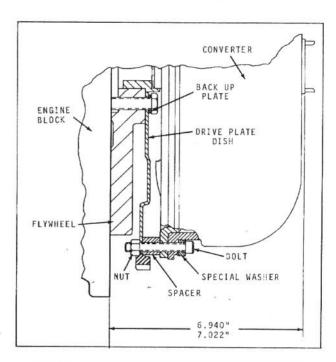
CUTAWAY ILLUSTRATION OF TORQUE CONVERTER INSTALLED ON GASOLINE ENGINES
